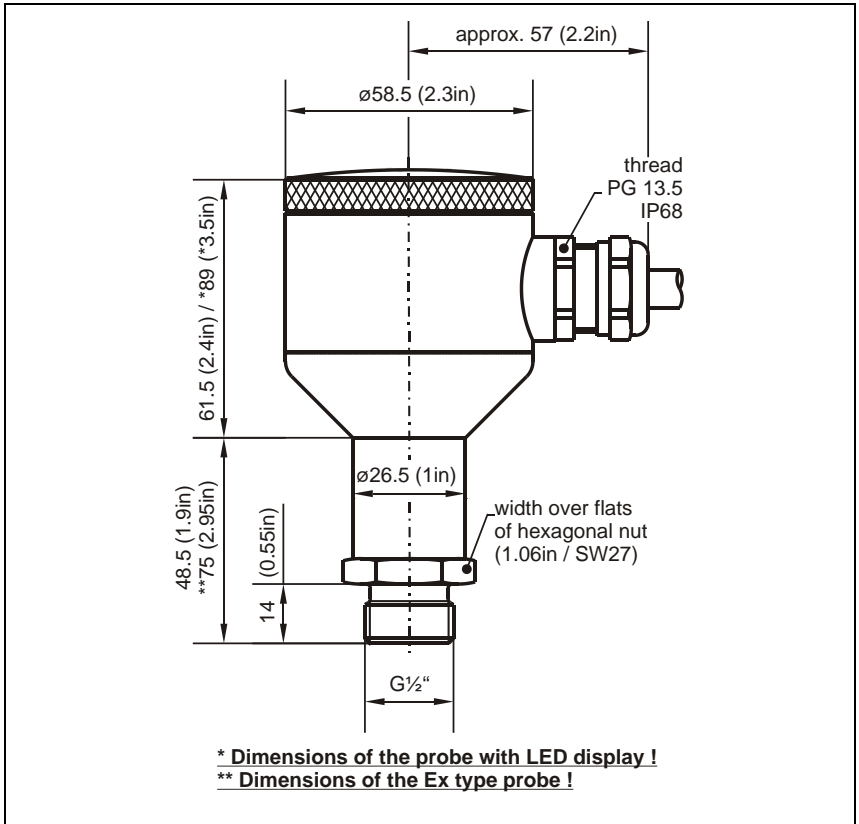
UniBar E II with Display (in stainless steel enclosure)
